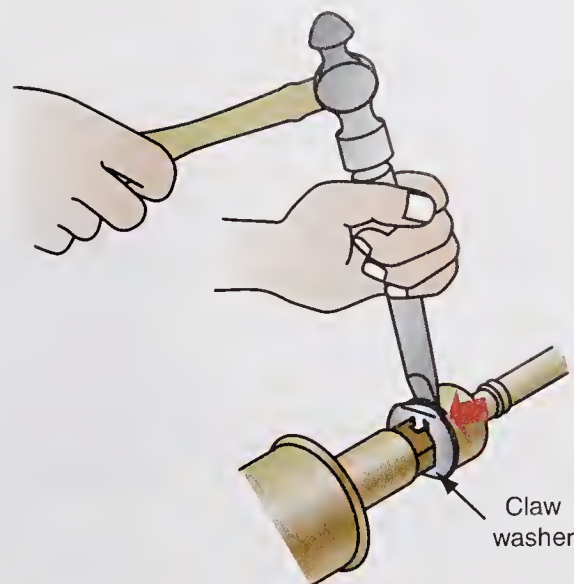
Removing claw washers from inner tie-rod sockets.
